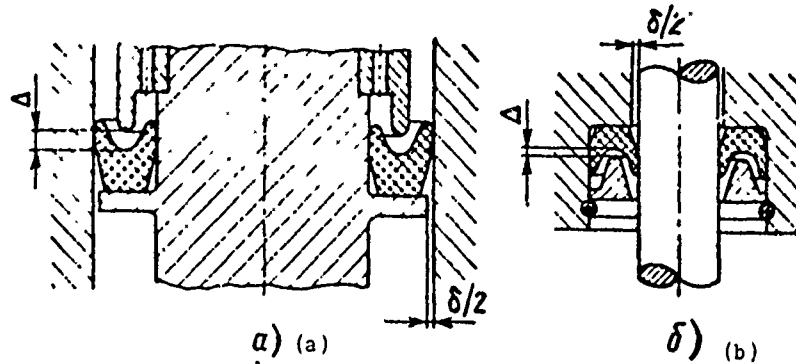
Diagram of seal ring installation: a - of a movable seal ring; b - of a stationary seal ring.
